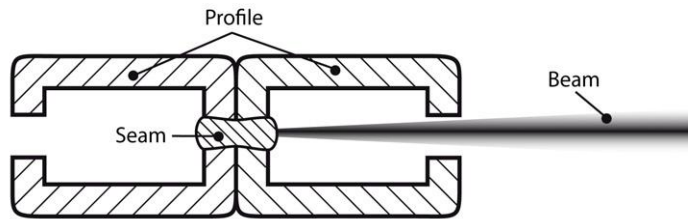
Remote laser beam welding of parts with limited accessibility to the processing zone
